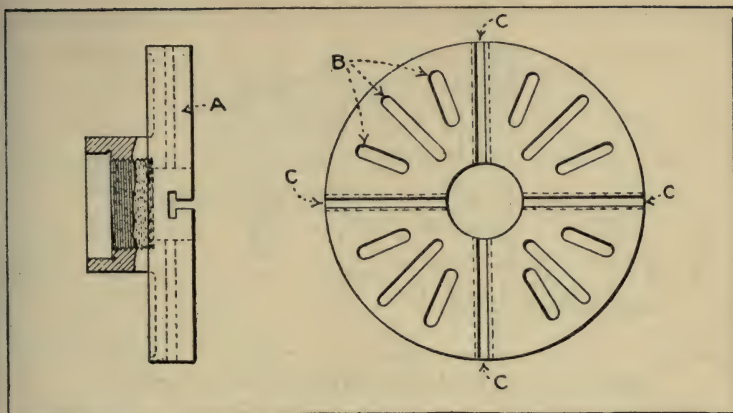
STANDARD FACE PLATE FOR AN ENGINE LATHE
